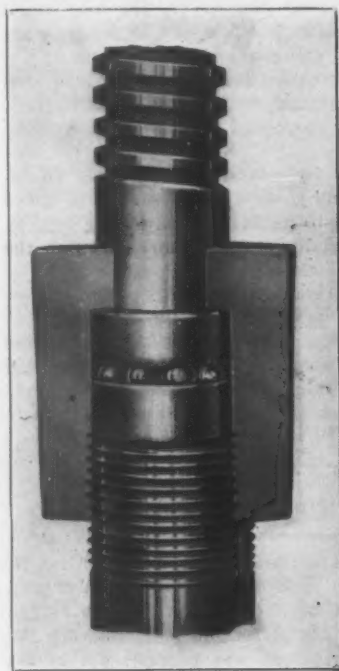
The Ball Bearing Feed Nut Used on These Drills.
